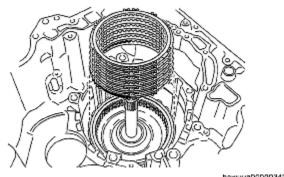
Removing Snap Ring Courtesy of MAZDA MOTORS CORP.
